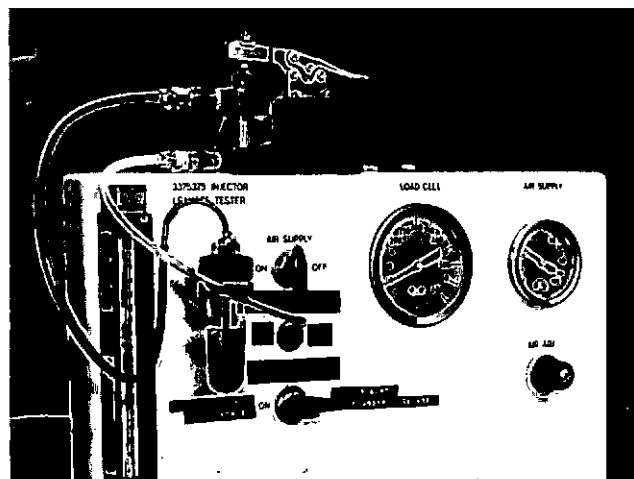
, (F60290). Service tool attached to, Part No. 3375375 tester.
